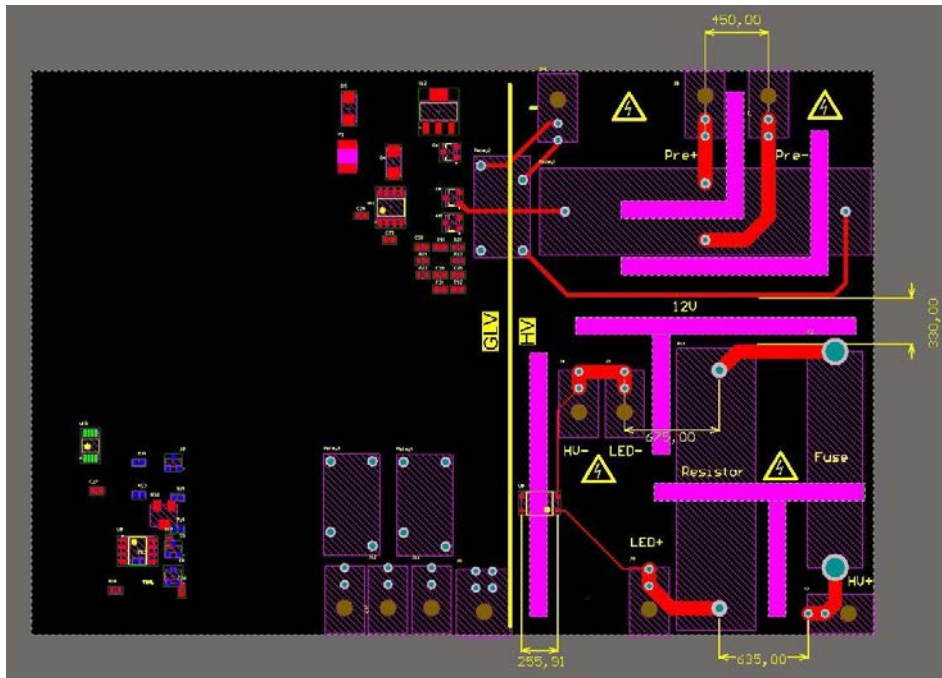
Accumulator indicator - High voltage PCB spacing
